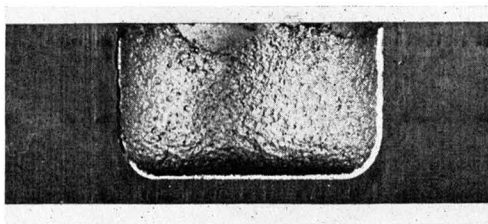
Cross-sectional view of molded  $\frac{3}{4}$  in. diameter cavity coated with solder spray.
